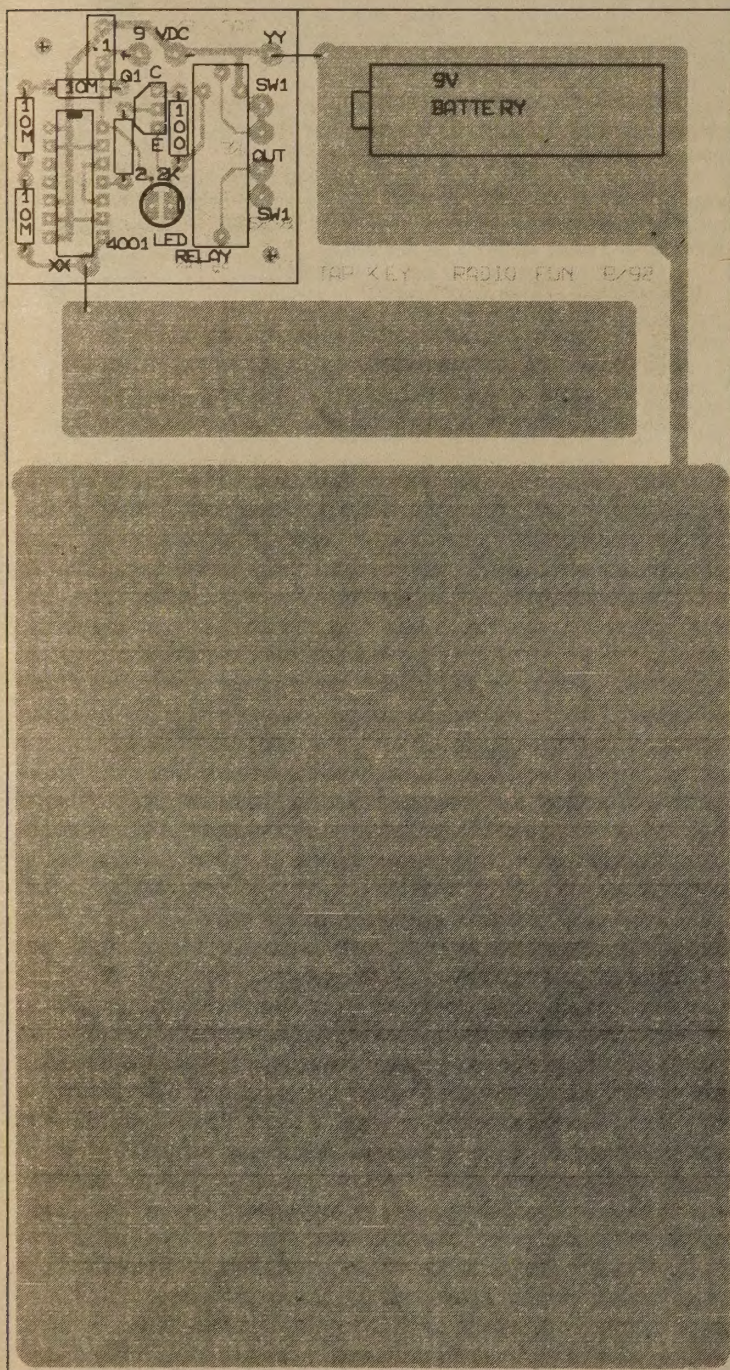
Attaching the Tap Key component board to the tap plate board. The small board is held in place by short jumper wires soldered between the two boards (note the two holes in the corners with no traces attached to them). Next attach wires from points "XX" and "YY" on the component board to the main tap plate board as shown. Then hook up a 9-volt battery to the indicated points and run a line to your transmitter's keying jack from the two pads marked "SW1 OUT".
